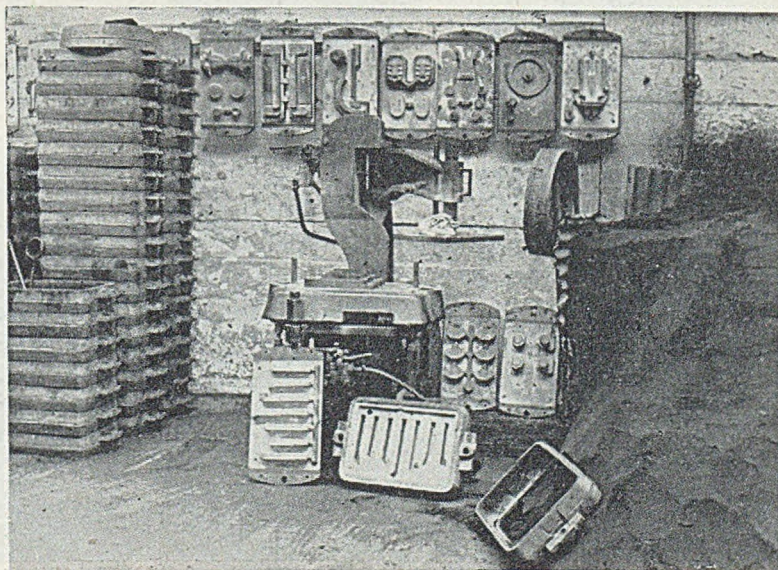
A Unit in the Machine-moulding Bay. Note the Orderly Arrangement of Pattern Plates.
